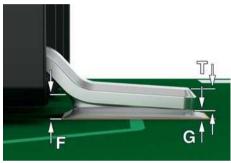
Flat gullwing connection, minimum height of the soldering spot at the heel (F)
